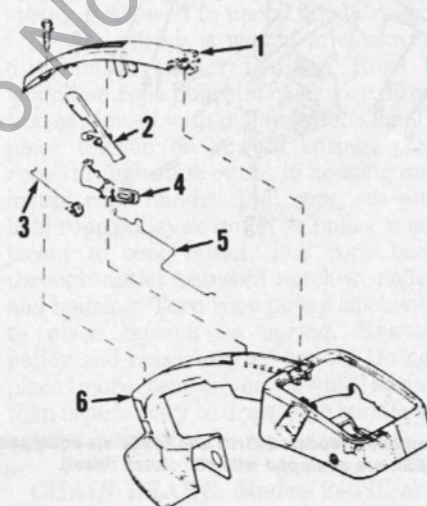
View of trigger assembly used on 240HG and 240SL models.
